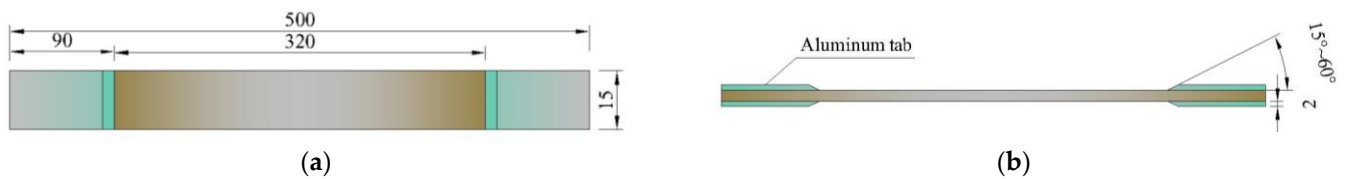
Schematic view of CFRP plate coupon: (a) front view; (b) side view (unit: mm).
